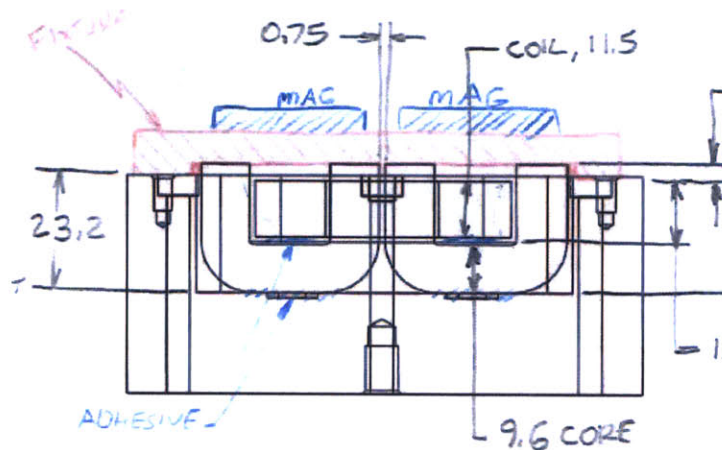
Fixture for making c-cores parallel to housing surface.
